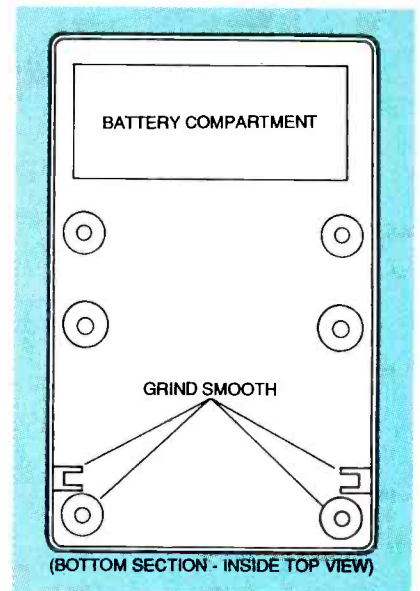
PLASTIC STANDOFFS molded to the bottom half of the case must be removed.
